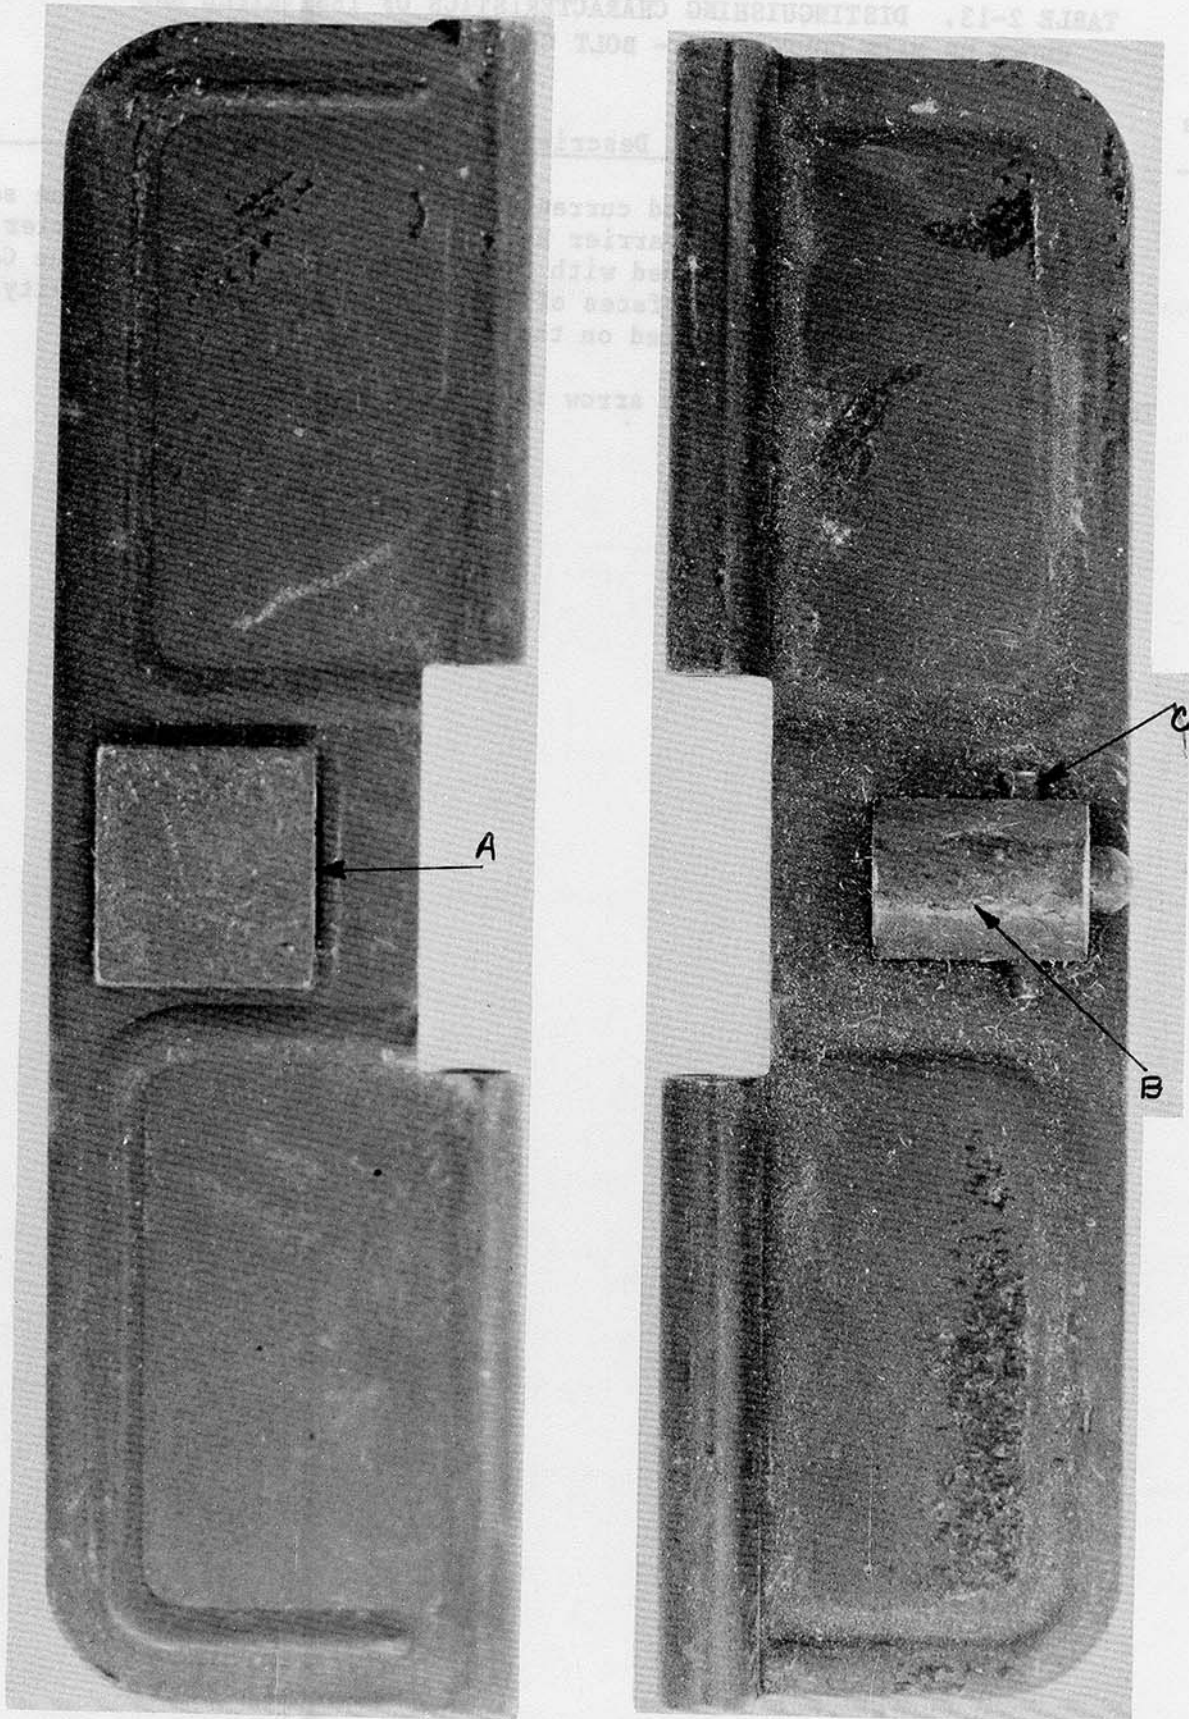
Ejection port cover from US supply. Outside view at top. Inside view at bottom.
